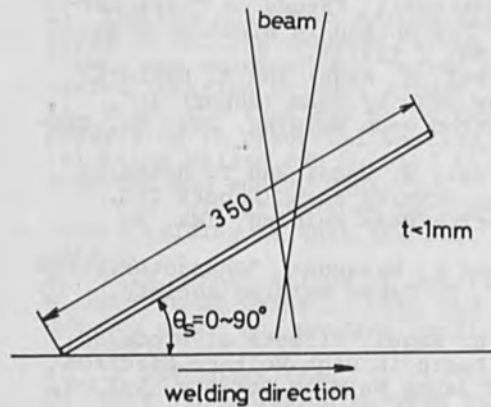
Schematic drawing of slope welding with thin plate.
